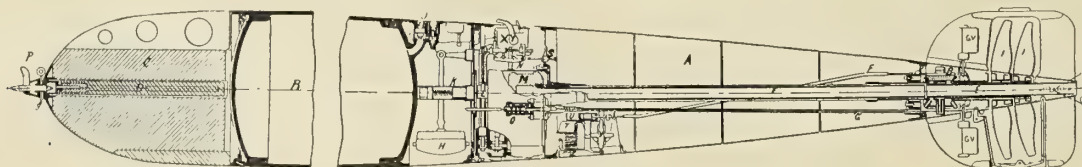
SECTIONAL VIEW OF A TORPEDO.
